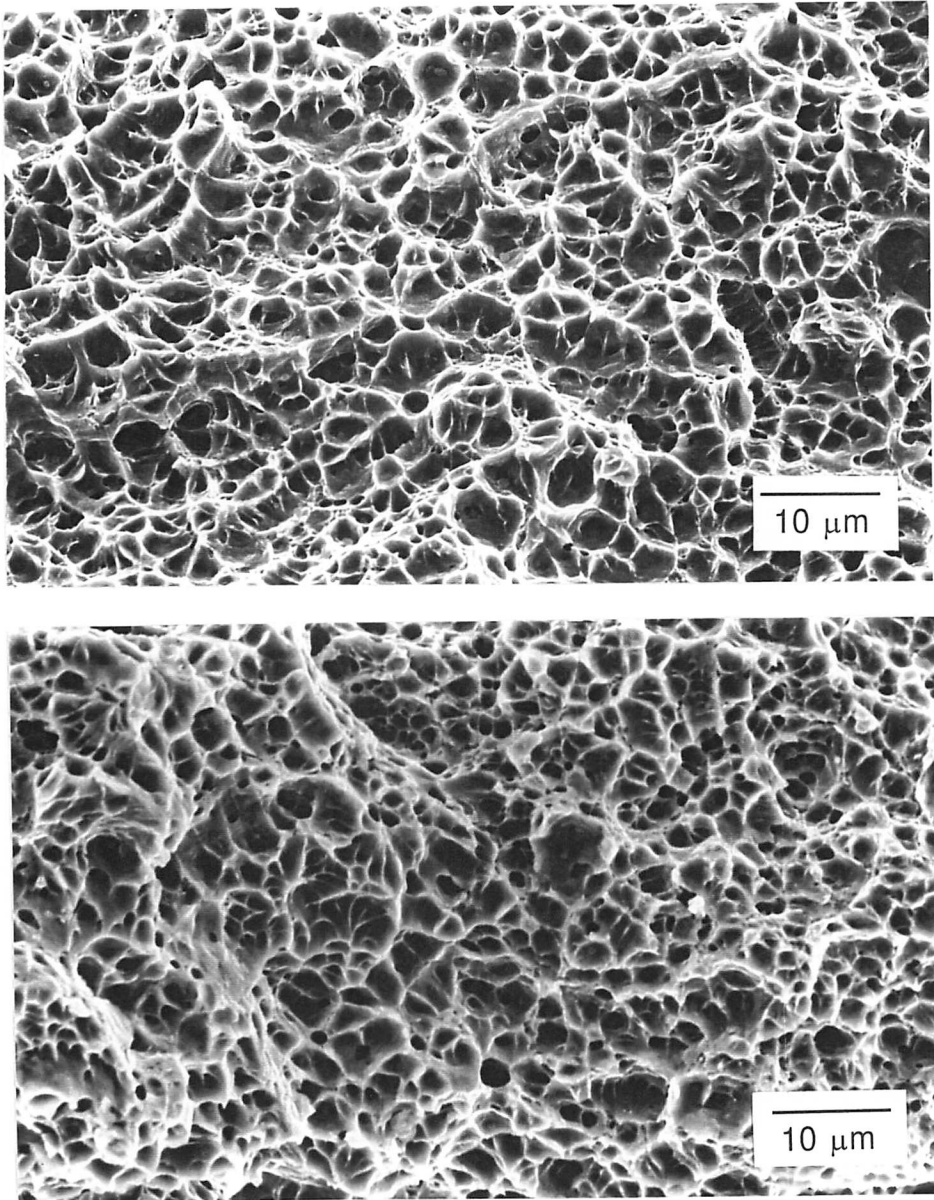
Scanning electron microscopy of the fracture surfaces of (top) as-welded and (bottom) 600 °C heat treated specimens.
